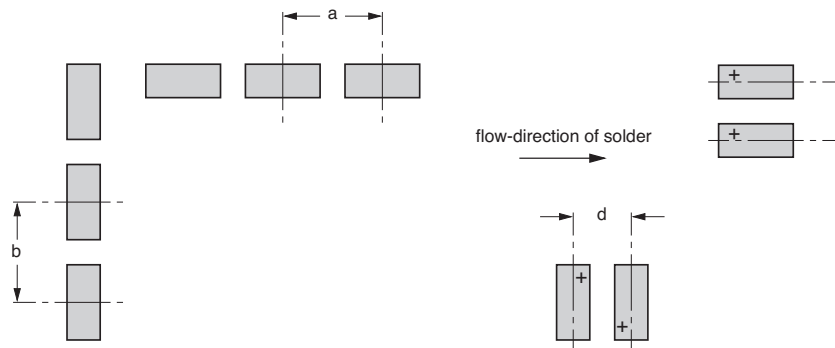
Recommended pad dimensions for reflow and wave soldering.
